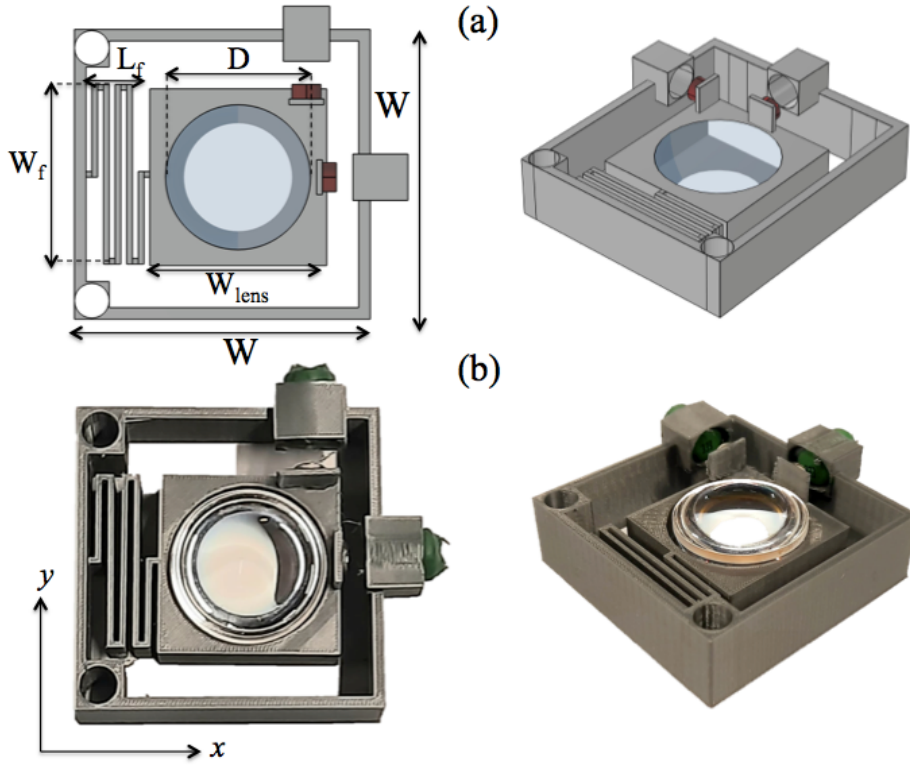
Designed 3D-printed scanner; two different views from a) the CAD drawing and b) the manufactured device.
